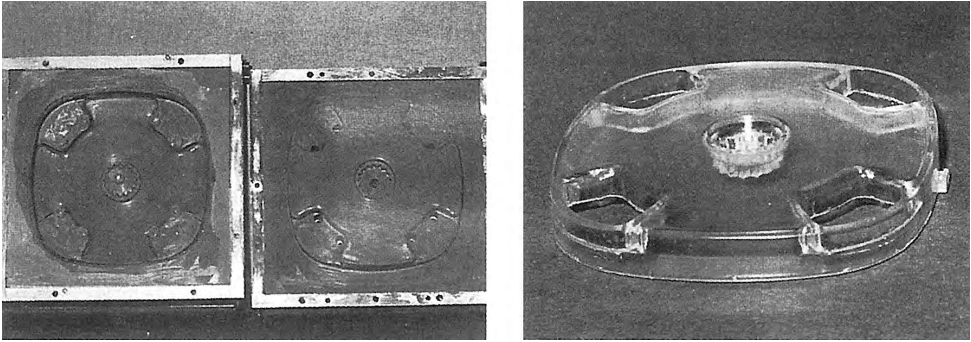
Removable metal inserts can be used to produce fine details such as the hole for a hollow boss. Alternatively, features such as holes can be machined in a secondary operation
